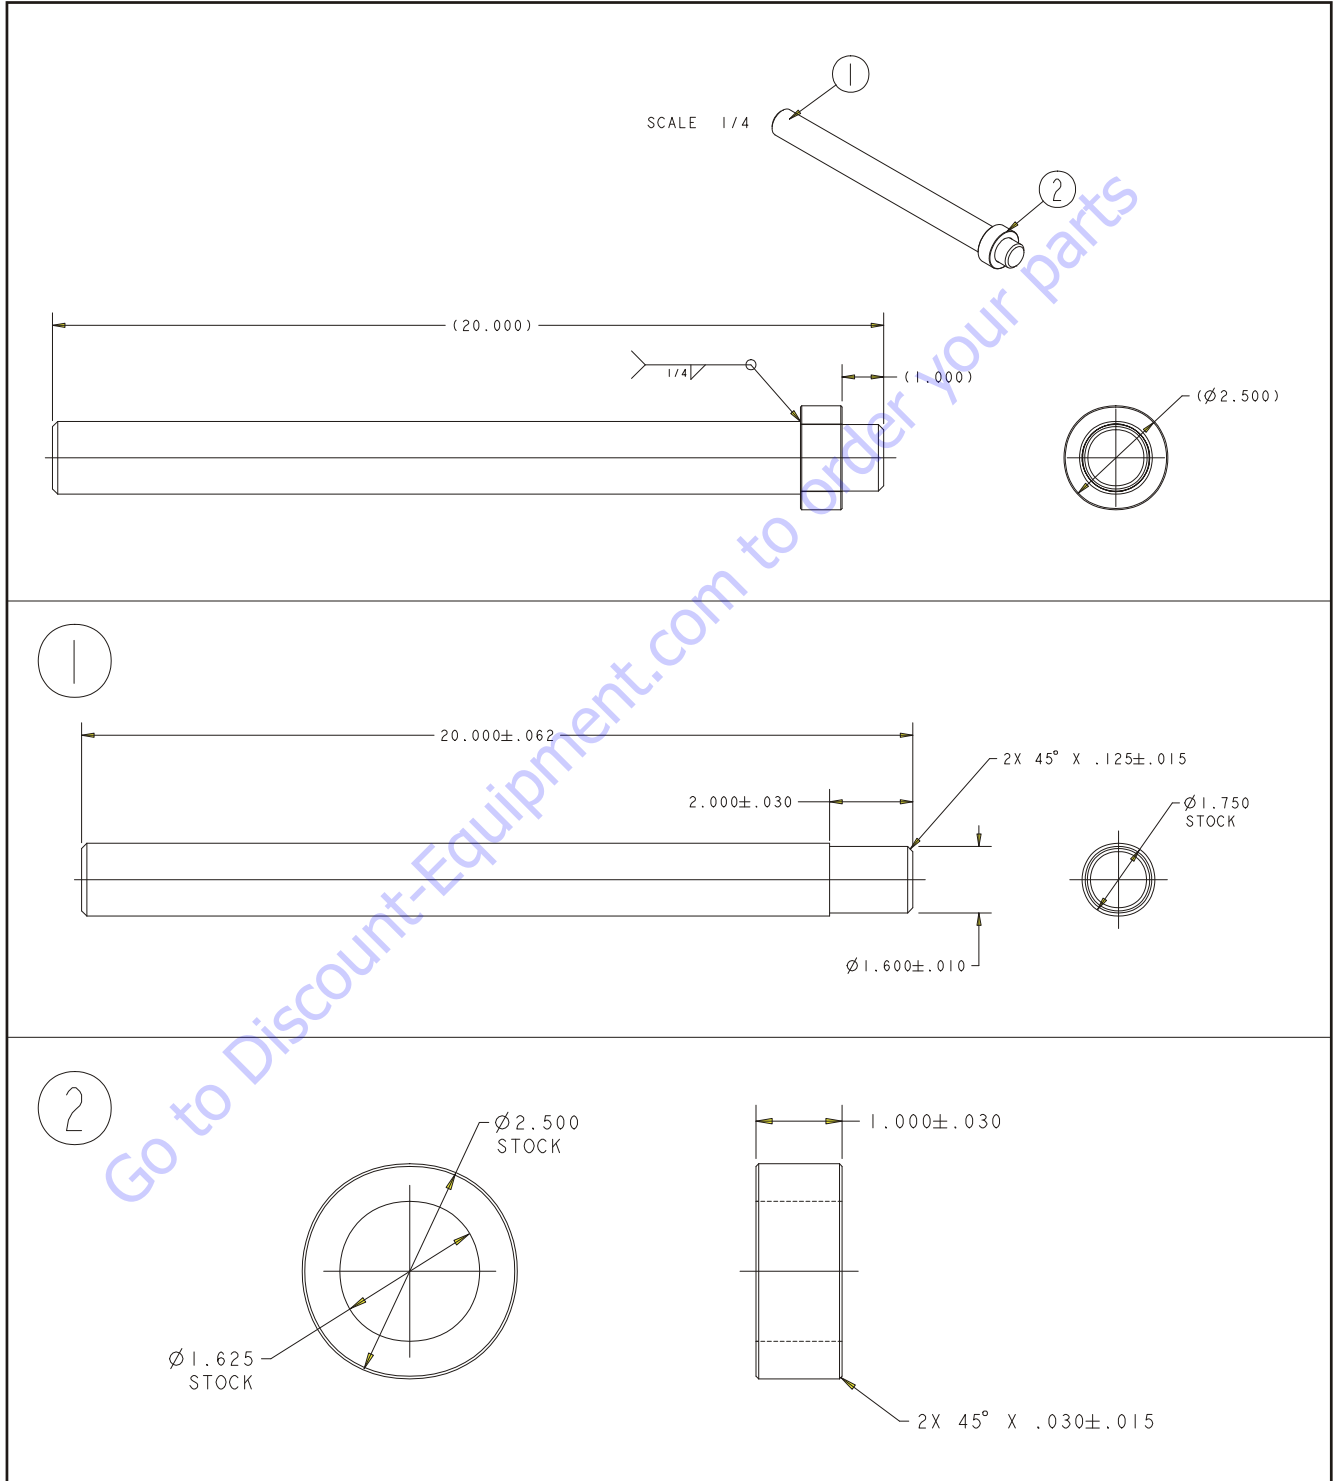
Load Pin Removal Tool, JLG PN 4846765
